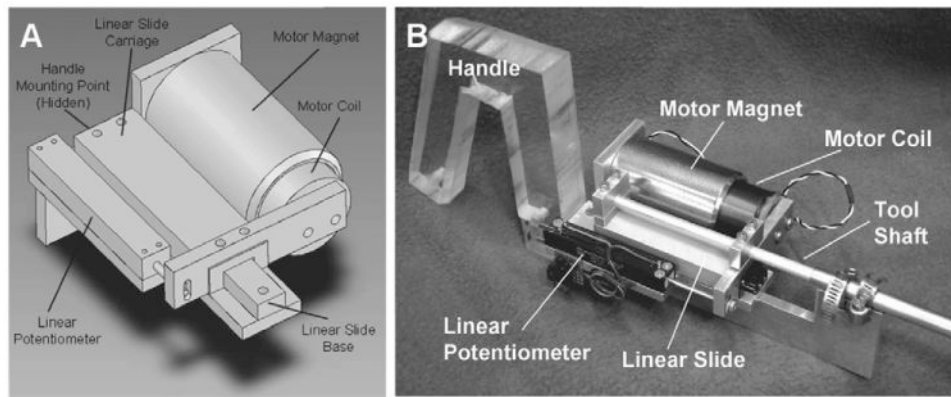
MCI design and prototype. A, MCI actuation package. The MCI may be mounted by its base (at the upper left of the image) to a robot or handle. The surgical anchor driver is mounted on the linear slide carriage. B, MCI hardware prototype.
